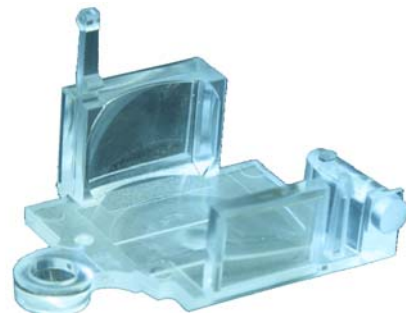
Monolithic view finder module of a single-use totally plastic camera. The module integrates several optical, mechanical, fabrication- and assembly-related features.
